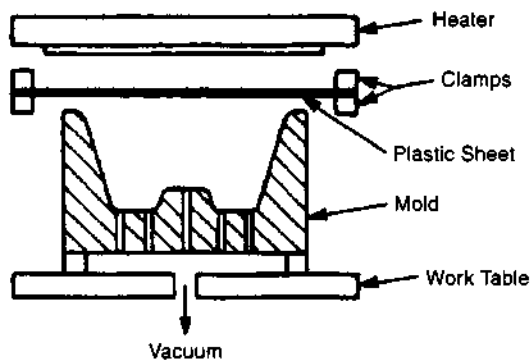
D1 Straight vacuum forming. Thermoplastic sheet is clamped, heated to the softening point, and placed against a one-piece mold cavity. A vacuum pump evacuates the air below the sheet, and atmospheric pressure forces the sheet against the mold so that it assumes the shape of the mold. The sheet cools and stiffens and can be removed and, if necessary, trimmed. (from Bralla, *Design for Manufacturability Handbook*.)
